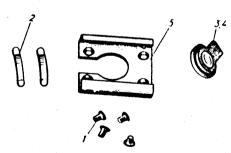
Slace (of cableless flashlamp): 1—screw 8905 762: 2—spring 8 387 112: 5—contact 6 622 305: 4—washer 8 912 079; 5—shoe 8 212 212
